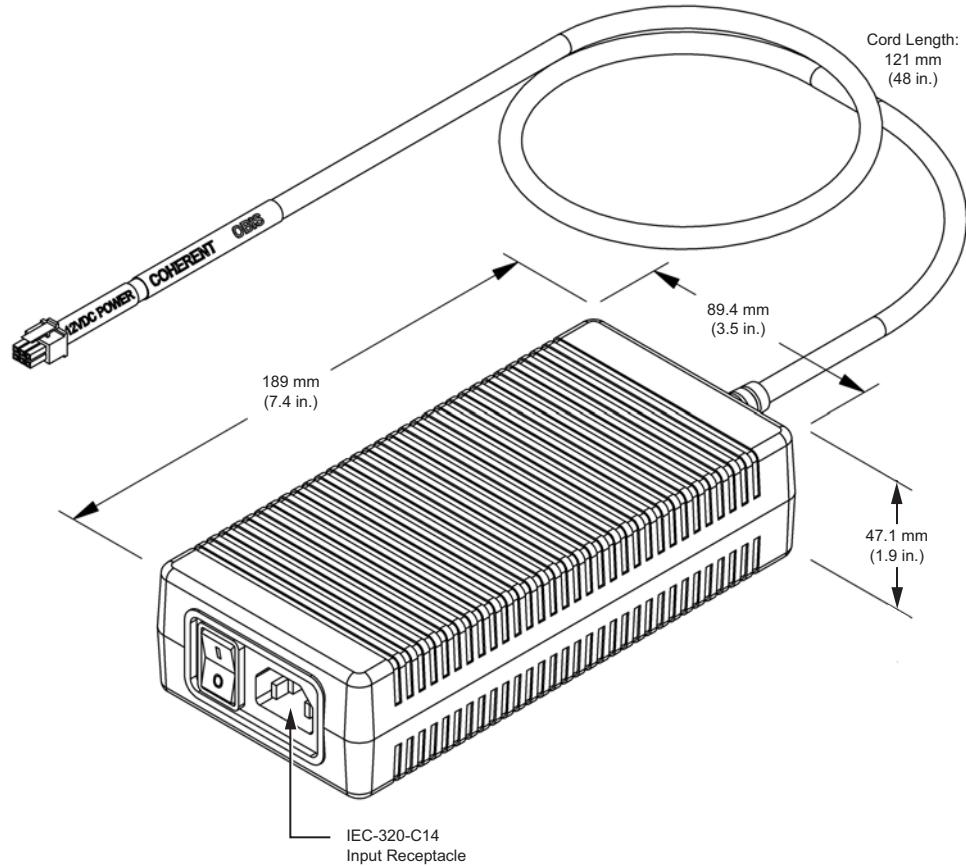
OBIS 6-Laser Remote Power Supply Dimensions
